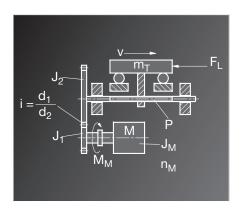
Screw drive with lateral motor mount at right hand side (mounting condition 04)
